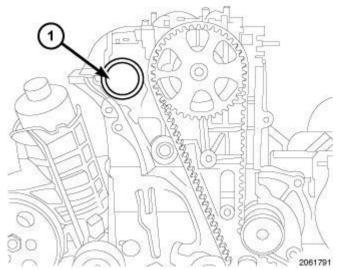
Exhaust Camshaft Oil Seal Courtesy of CHRYSLER LLC
